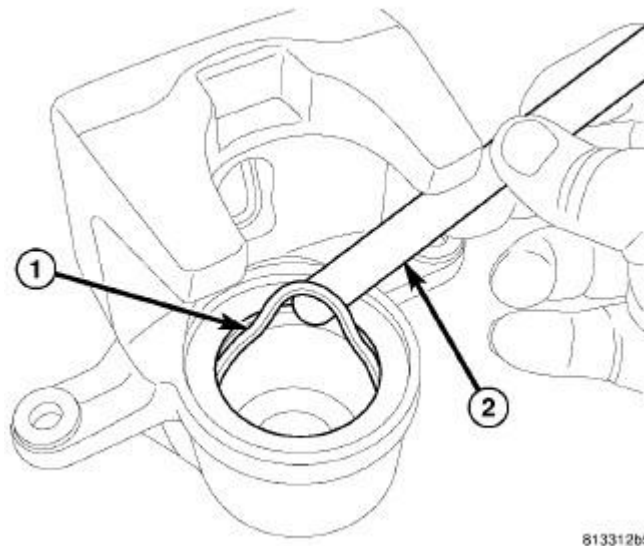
REAR CALIPER DUST BOOT REMOVAL
